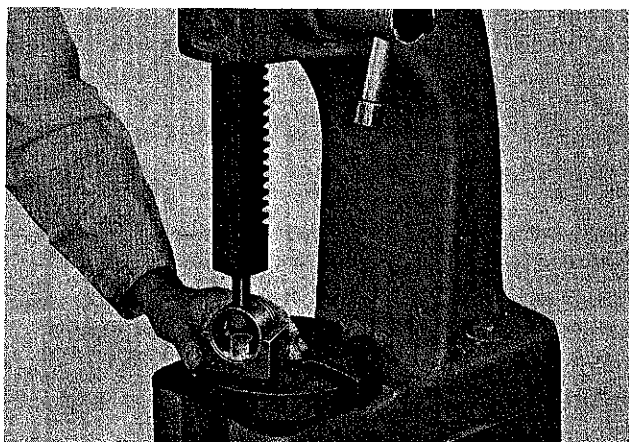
Pressing the closed-end bearing into the piston. The inner edge of the bearing must not be pressed lower than the piston boss, or the connecting rod and thrust washers cannot be inserted.
